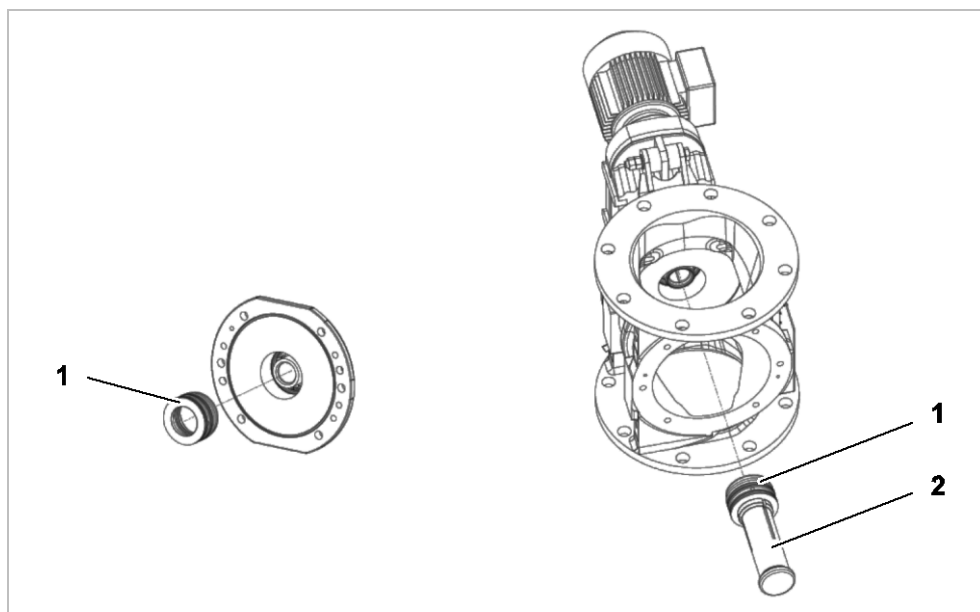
Individual parts, shaft sealing cartridge (.4 / .5 design)
